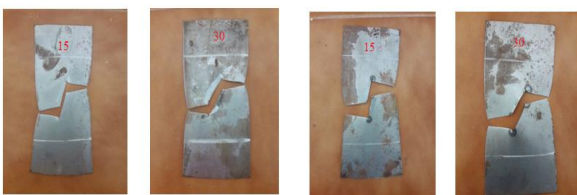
15° and 30° inclined crack with and without weld after testing
